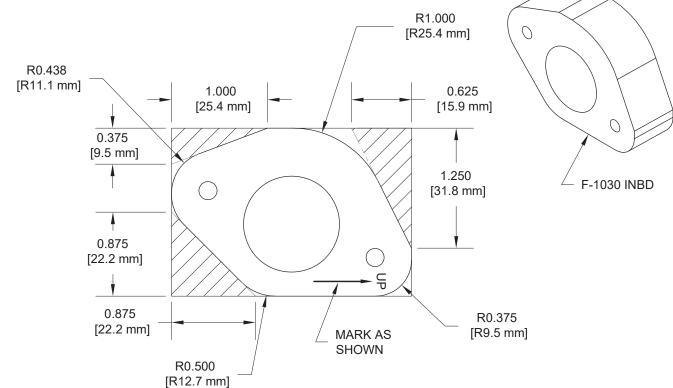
TRIM INBOARD UHMW BUSHINGS
